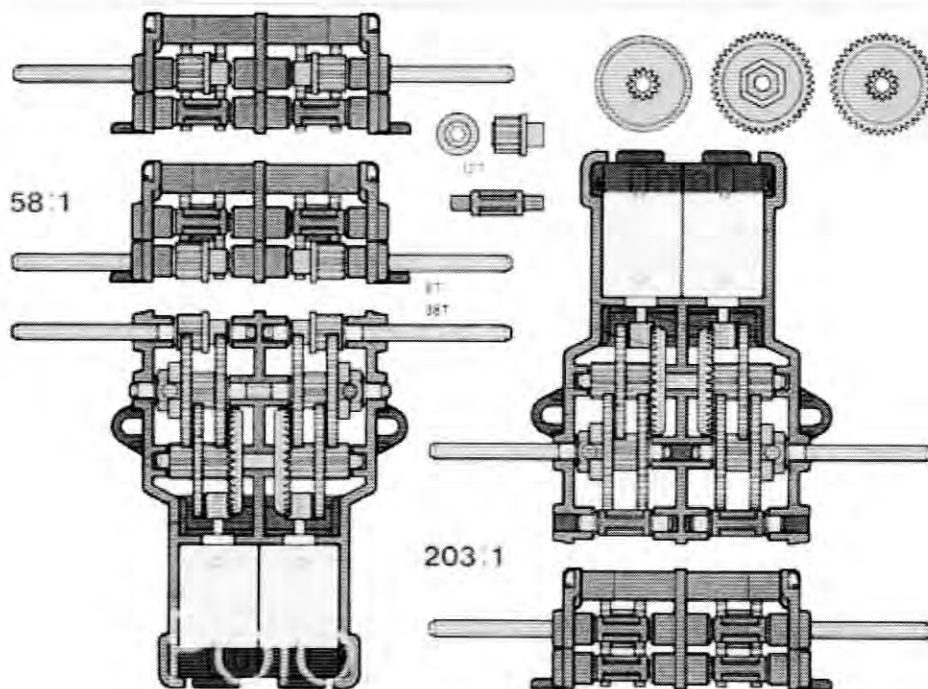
Twin – Motor Gearbox Motor Dimension
